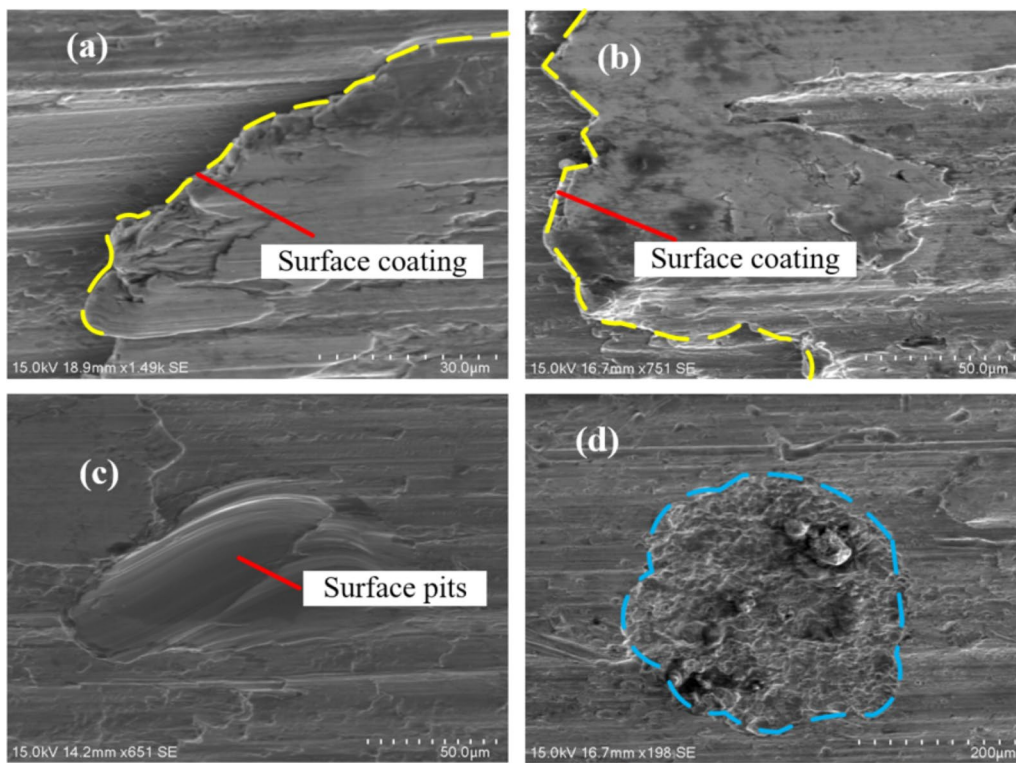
Surface coating and pits of contour bevel gear machined by dry milling
